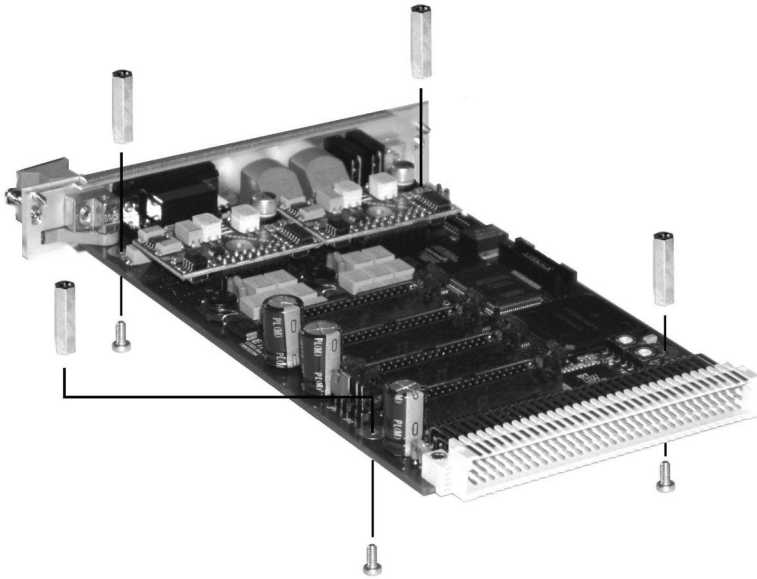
Mounting Distance Pins on the ES1651.1-B Carrier Board
